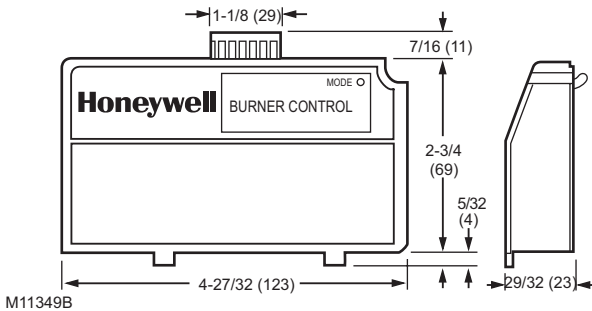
Mounting dimensions of S7810B Multi-Drop Switch Module in in. (mm).
